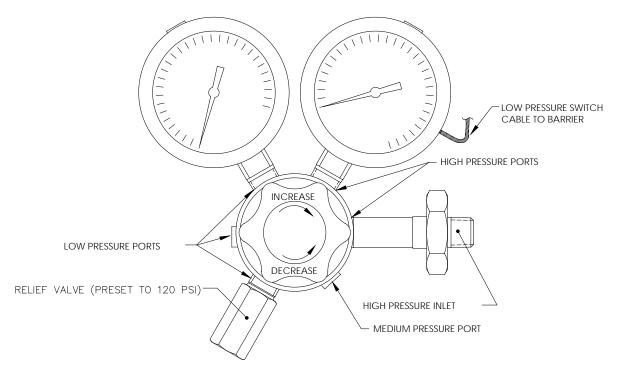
Carrier Gas Pressure Regulator with Relief Valve
